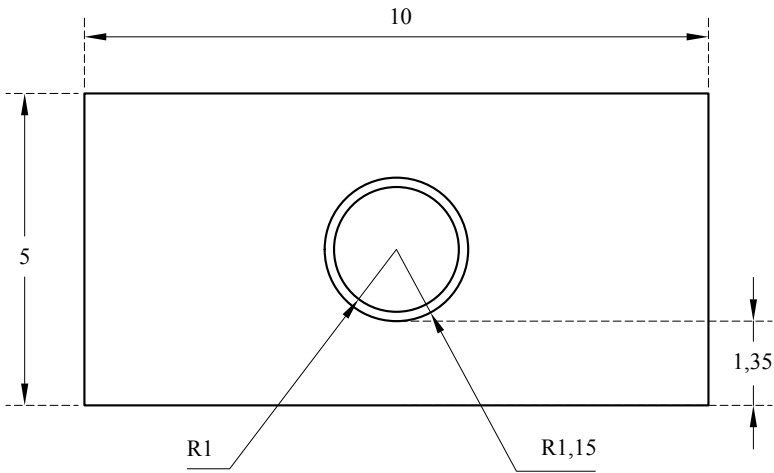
Cross-section sketch of tube/foam part. All dimensions are in mm.
